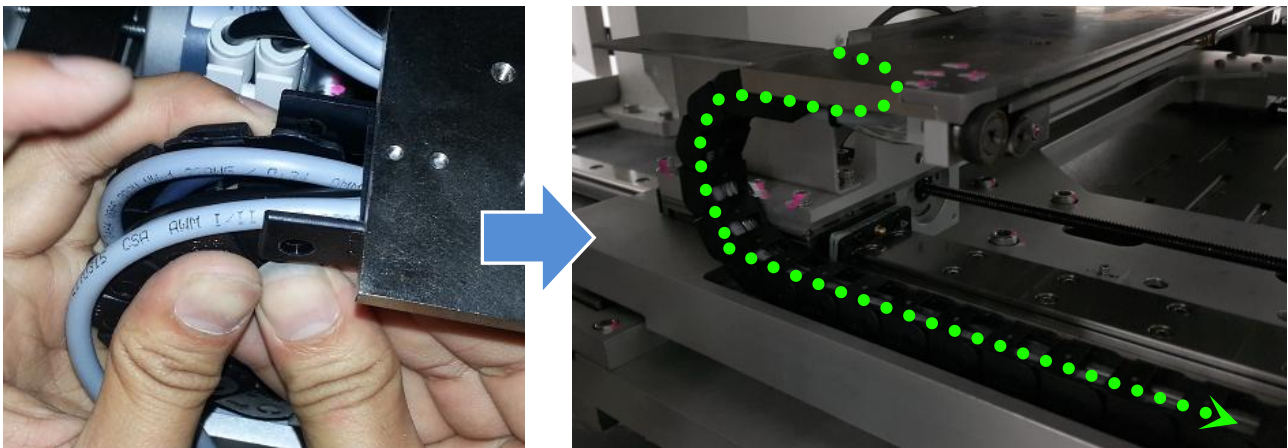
Stepper Motor Cable Routing (AWA E-Chain)
